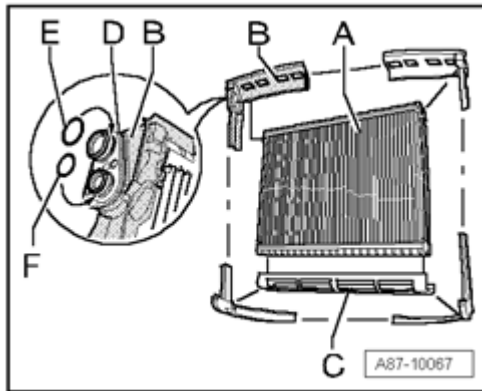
Identifying Plastic Tray, Evaporator, Rubber Seal, Connecting Flange, And O-Rings
